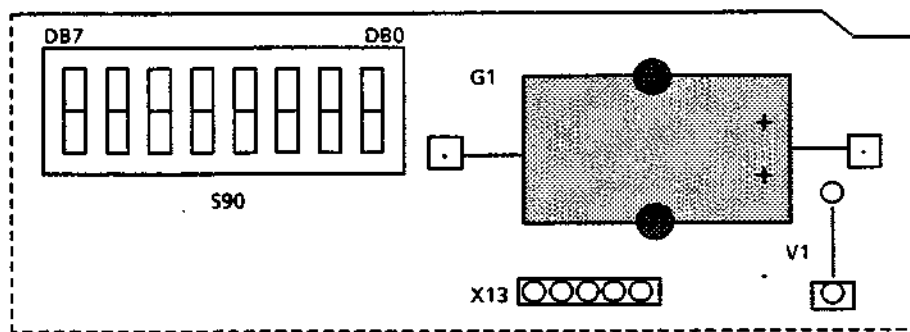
Mounting position of the battery and DIP switch S90 for setting the receiver configuration (cf. Section 4.3.4).
